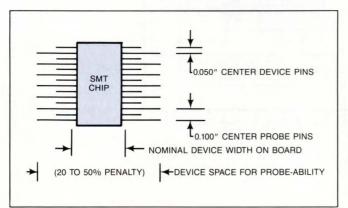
You can help implement in-circuit testing of SMT-type designs by spreading out traces and adding test points that ease access for a bed-of-nails test fixture. Unfortunately, this scheme will require lots of extra board space and provide little or no help when it comes to system-level functional testing.
